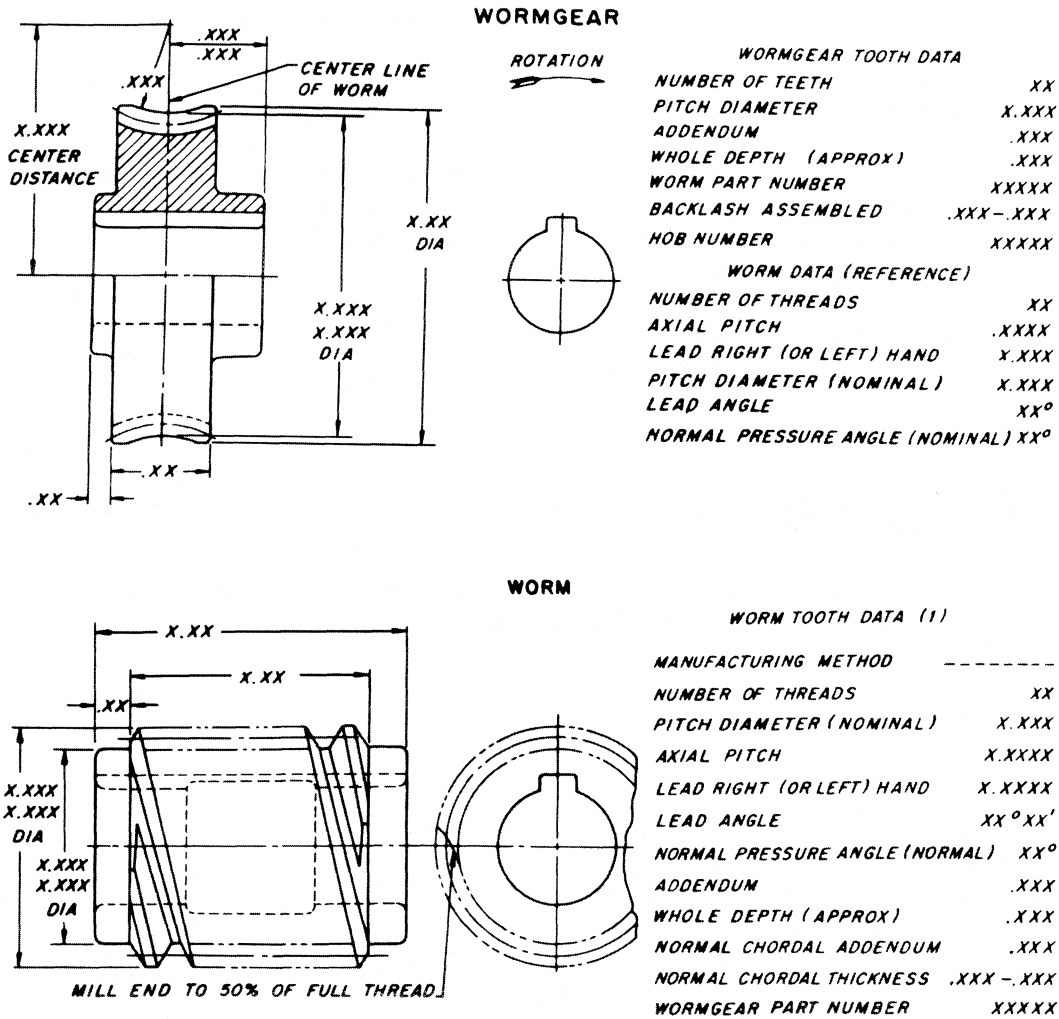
Dimensions Required for Worms and Worm Gears
